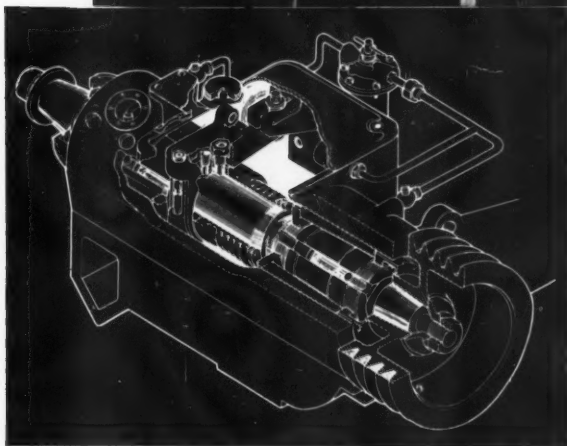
(Top) Section through a Norton Wheel Spindle and bearing.
